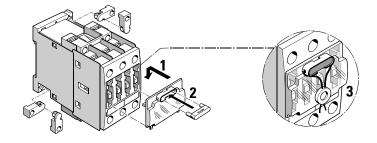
Contactor frame size:S0 to S12 with sealable cover
